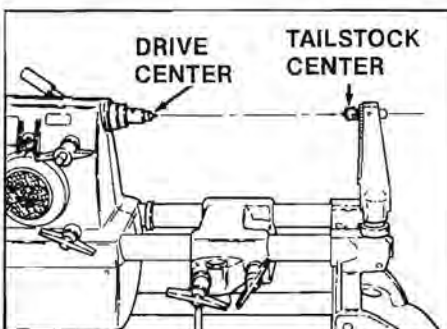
Both the drive center and tailstock center must be directly in line with each other in order to properly support a workpiece.
